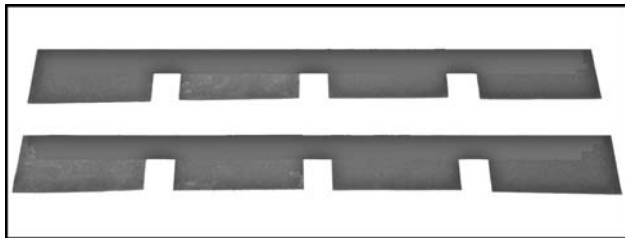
Magnetic Covers for Cylinder Head Intake Ports, ZTSE4559
